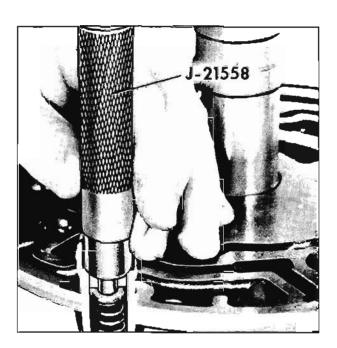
Installing Cooler Bypass Valve and Lube Blow Off Tube
